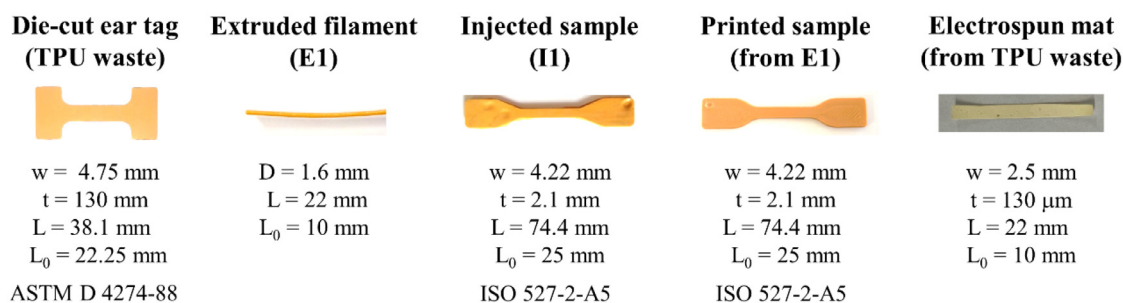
Different samples used for the mechanical behaviour analysis and their dimensions.
